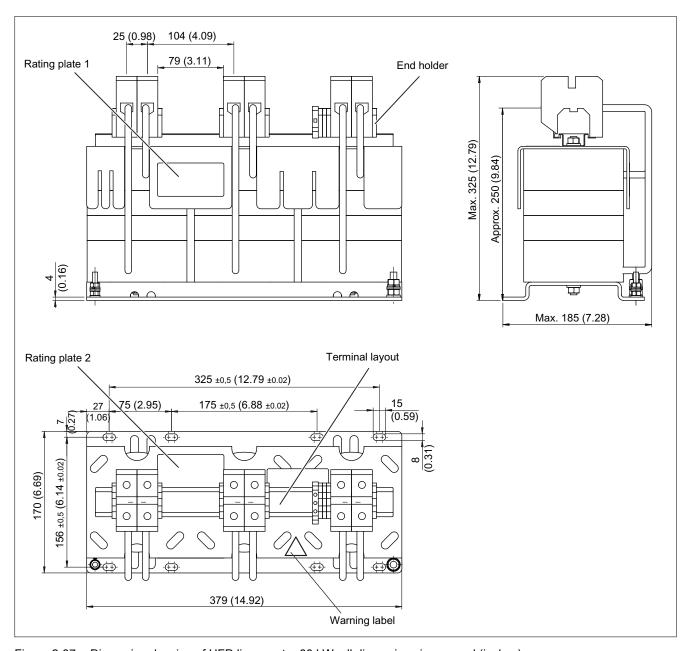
Dimension drawing of HFD line reactor 80 kW, all dimensions in mm and (inches)
